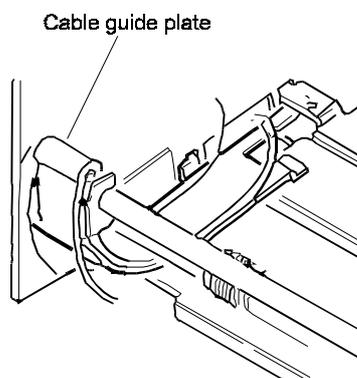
Removing the flat cable assembly (this figure is intended for parts identification only)
